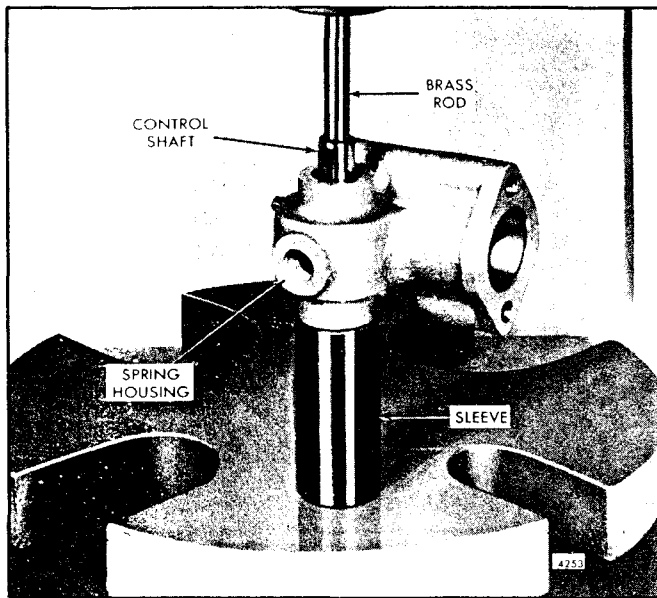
Removing Speed Control Shaft, Bearing and Cup plug from Governor Spring Housing
